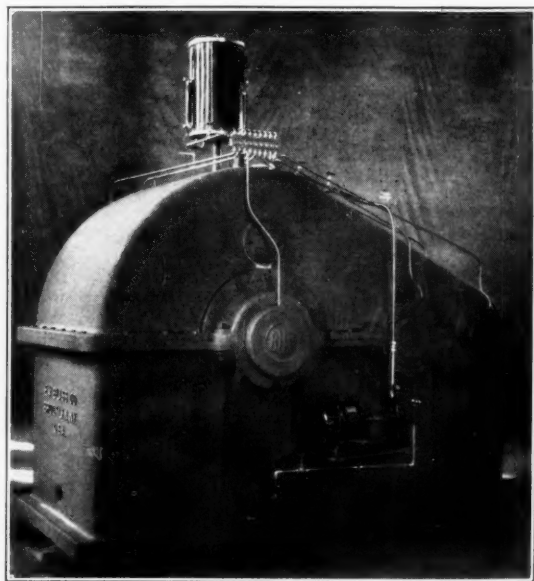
A 32 x 46 two-high universal mill, showing in particular the gearing arrangement and the relative size of the entire installation.
